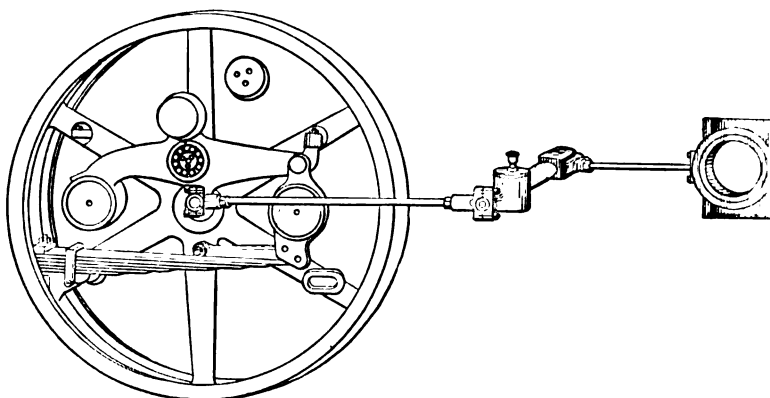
Governor, eccentric rod, rocker shaft, valve and valve stem
